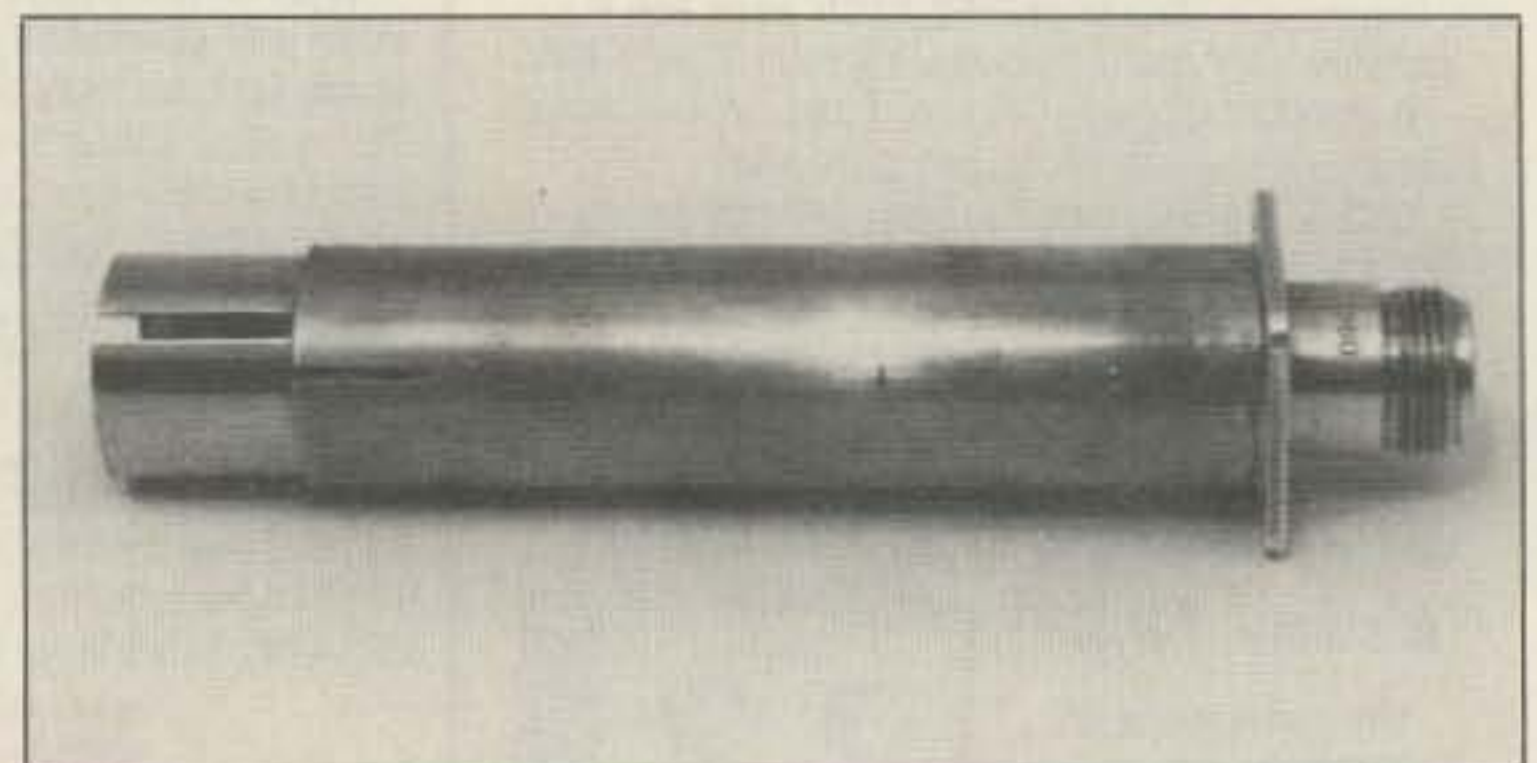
Photo B. Complete 23 cm impedance converter in process of being assembled to 3/4-inch CATV hardline. Assembly will be complete when spacer sleeve is pressed in place between the outer shell and the hardline itself, and the screw clamp is installed.
